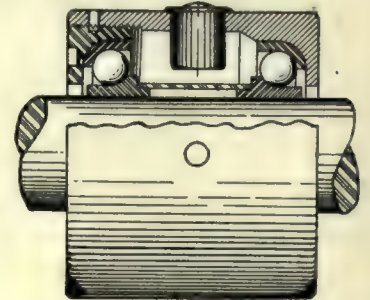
Light Shafting Bearing for Power Tables, Sewing Machines, etc.
